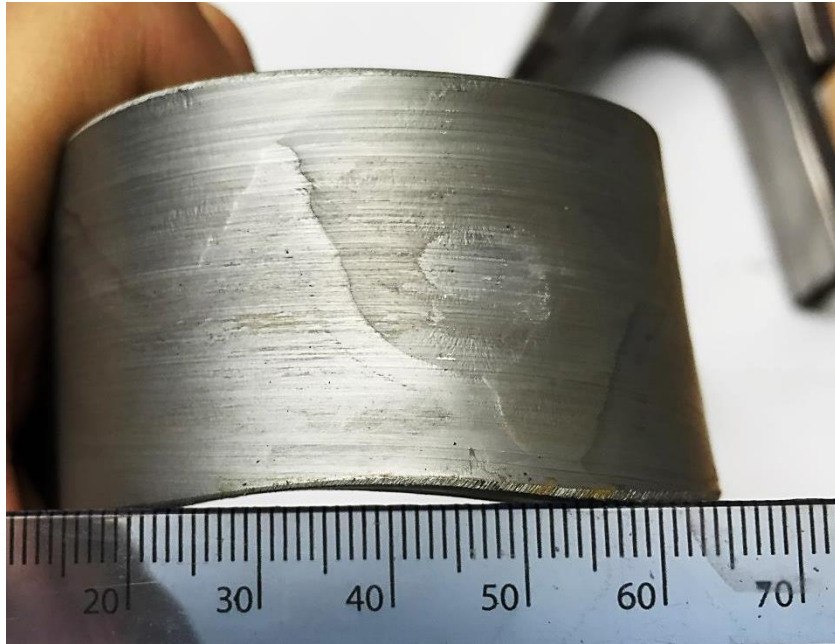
Sample 3 side bend test, face view (No heat treatment prior to welding and a 672h PWHT at 635°C).
